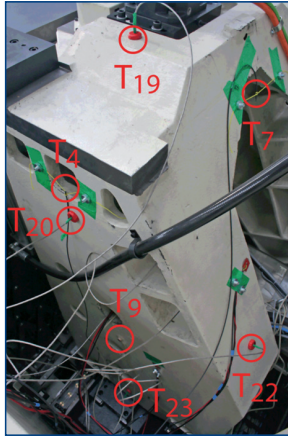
Resistance temperature detectors (RTD) placed on the machine tool frame
